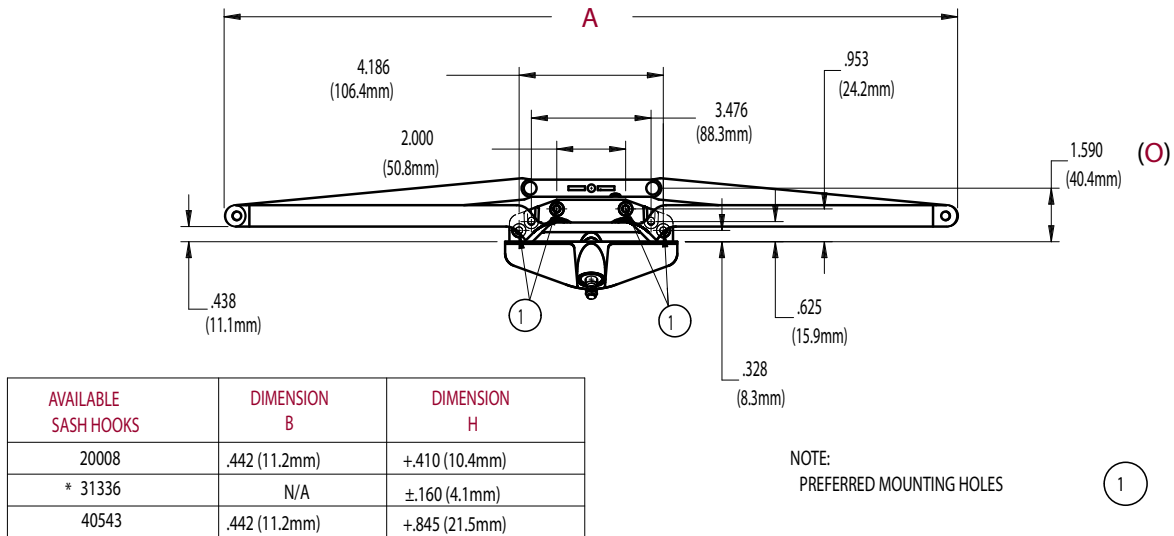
ROTO GEAR AWNING OPERATOR (SINGLE PULL)
